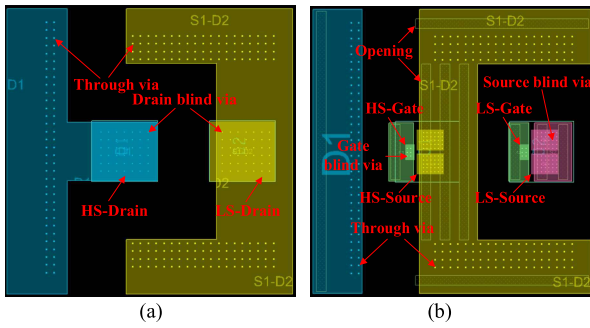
Packaging layout of the PCB-embedded SiC MOSFETs. (a) Front-side. (b) Backside.
